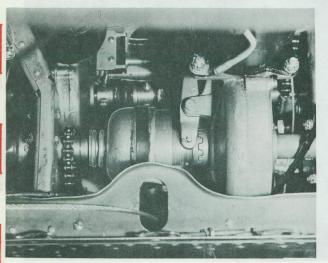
Landing-Gear Clutch, Teeth Engaged
